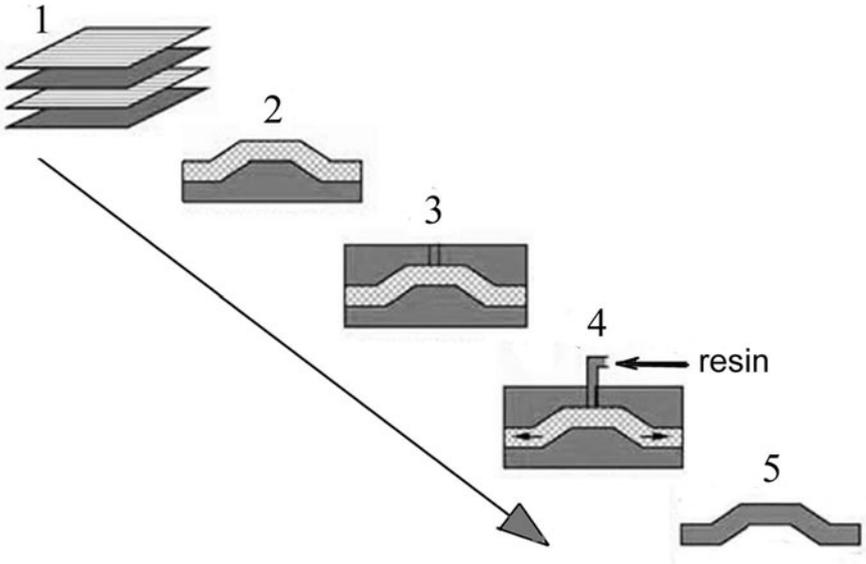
Resin Transfer Molding: 1) insert layers feeding; 2) insert preforming; 3) die closing; 4) low pressure injection and reaction process; 5) stamped piece.
